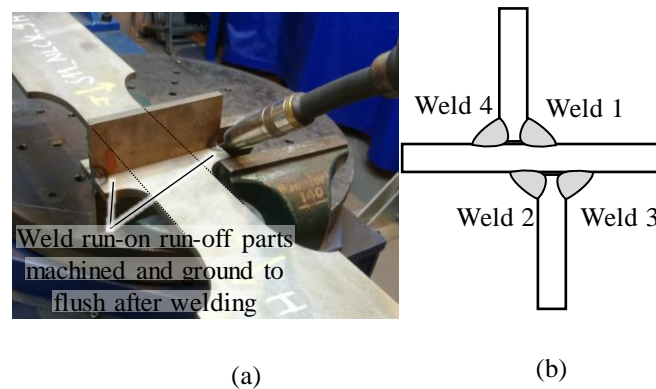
(a) Welding preparation of the test specimen with a robotic GMAW and (b) sequence of welds in the misaligned specimens.
